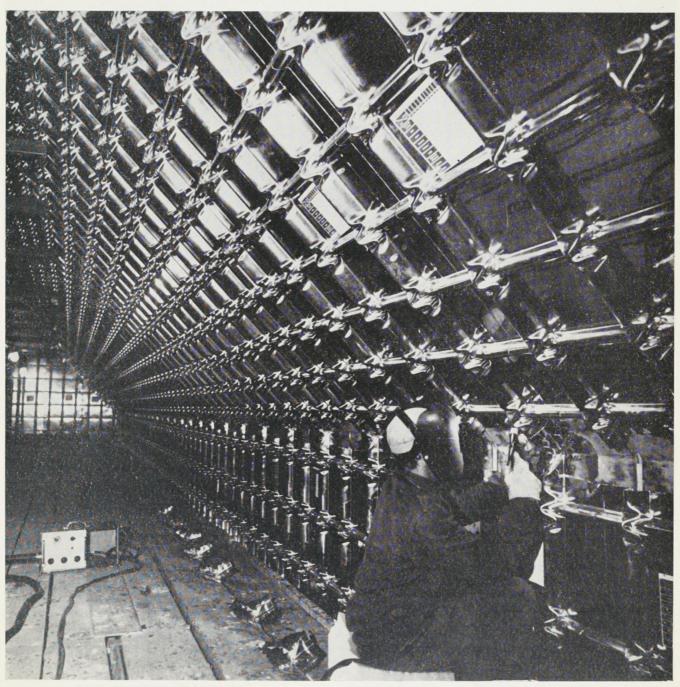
PLATE VI. TIG welding of the stainless steel primary barrier of the Technigaz membrane system.
